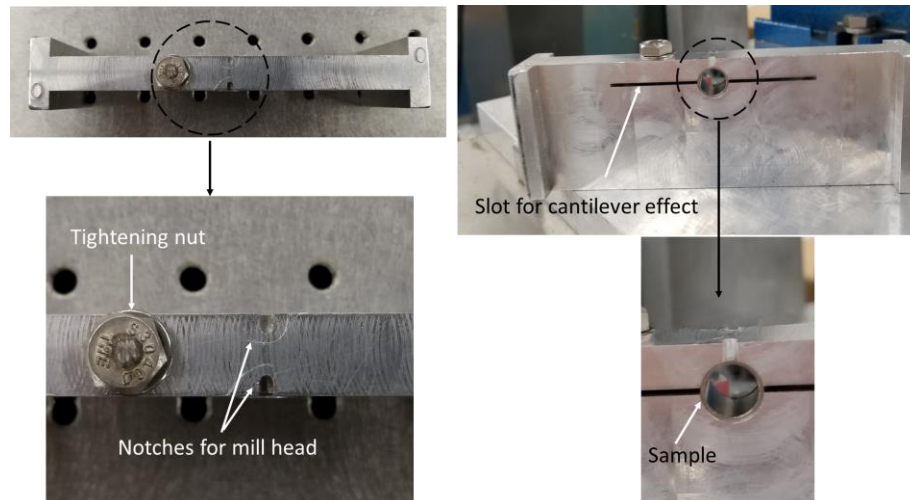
Holder for milling a double-edge notched specimen for PST tests.
